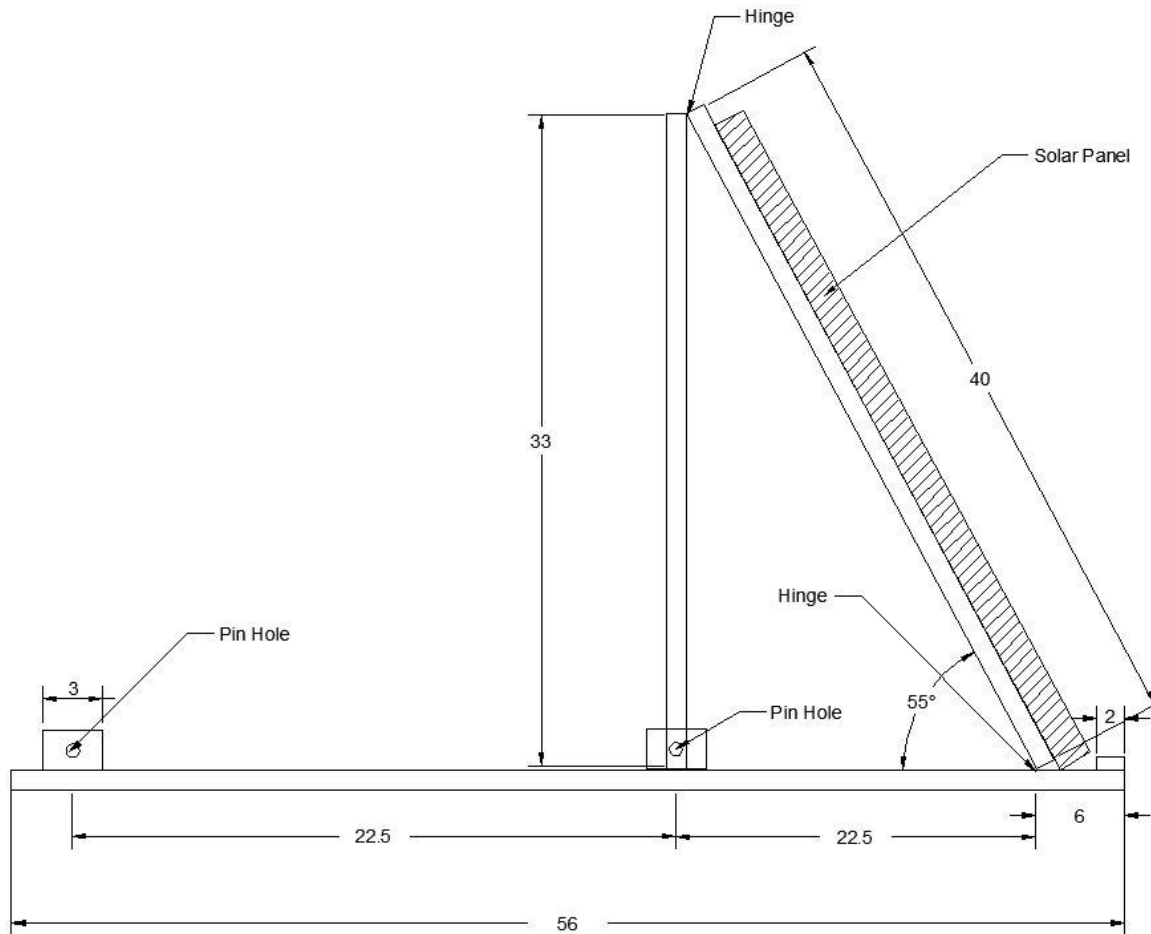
Side View of Solar Panel Adjustable Frame at 55°, units in inch
